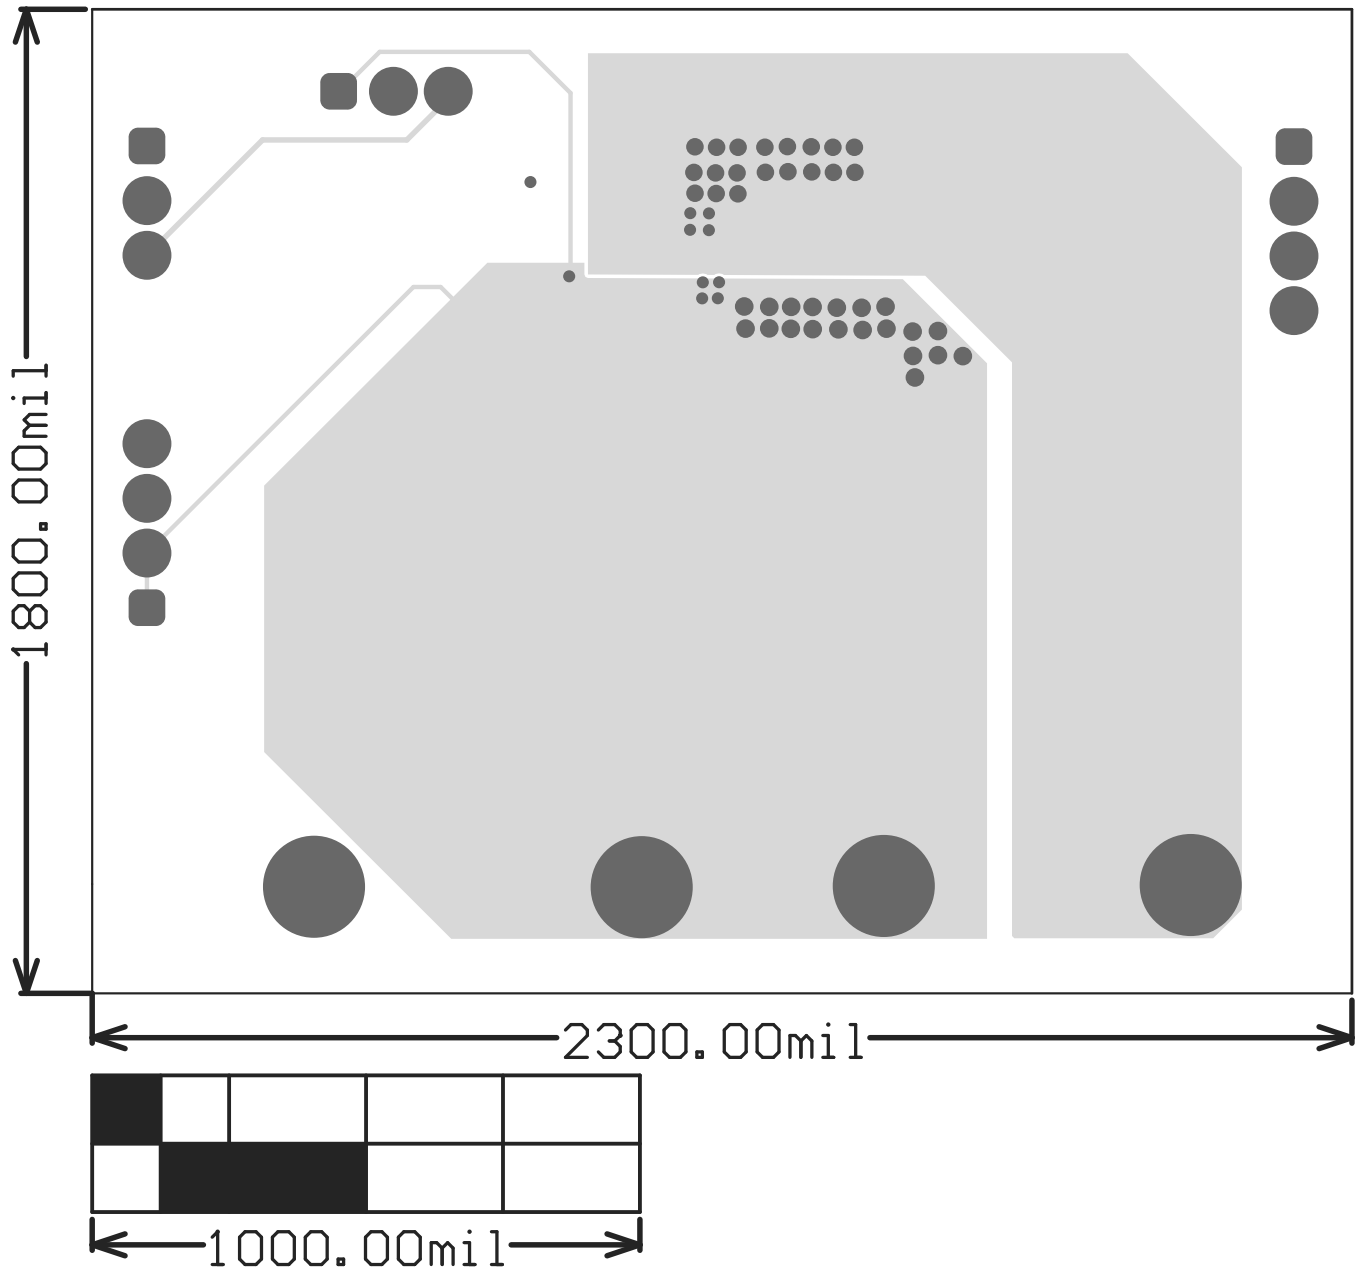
TPS61022EVM-034 Bottom-Side Layout
